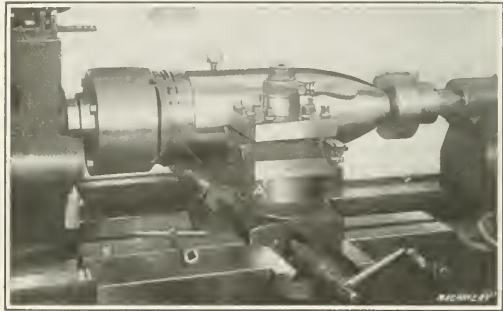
Set-up for turning Copper Band to Shape on a 24-inch Engine Lathe
